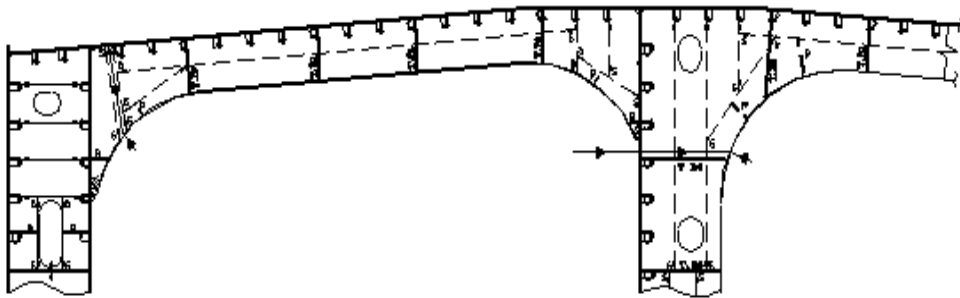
Structural arrangement of upper deck transverse web at the general design
